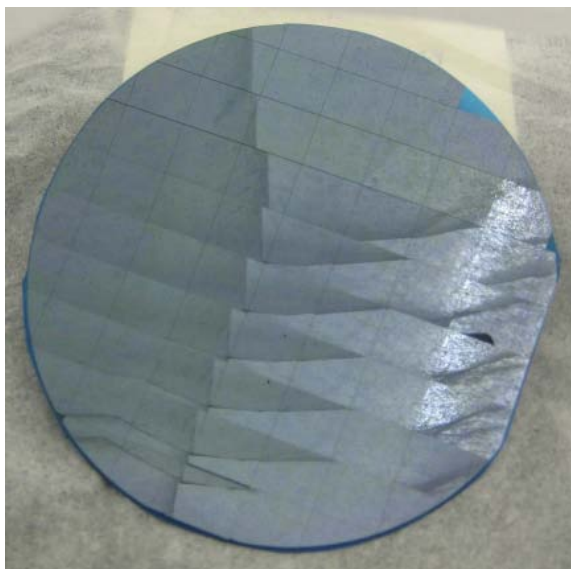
Photograph of diced 100 mm silicon wafer. The rectangular chips (10 mm by 12 mm) still have a protective polymer coating and are attached to the dicing tape. Each wafer yields about 50 useable chips.
